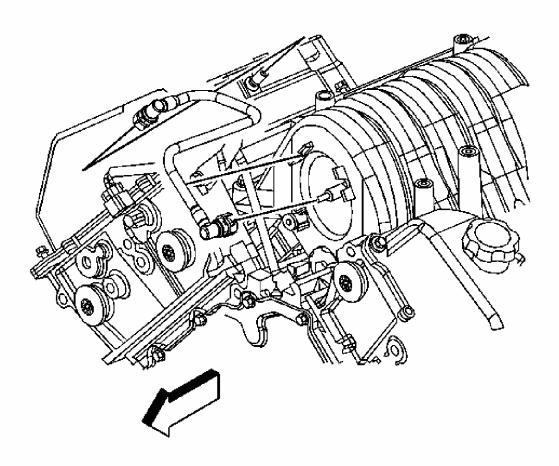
Identifying PCV Foul Air Tube Quick Connect Fitting Courtesy of GENERAL MOTORS CORP.
